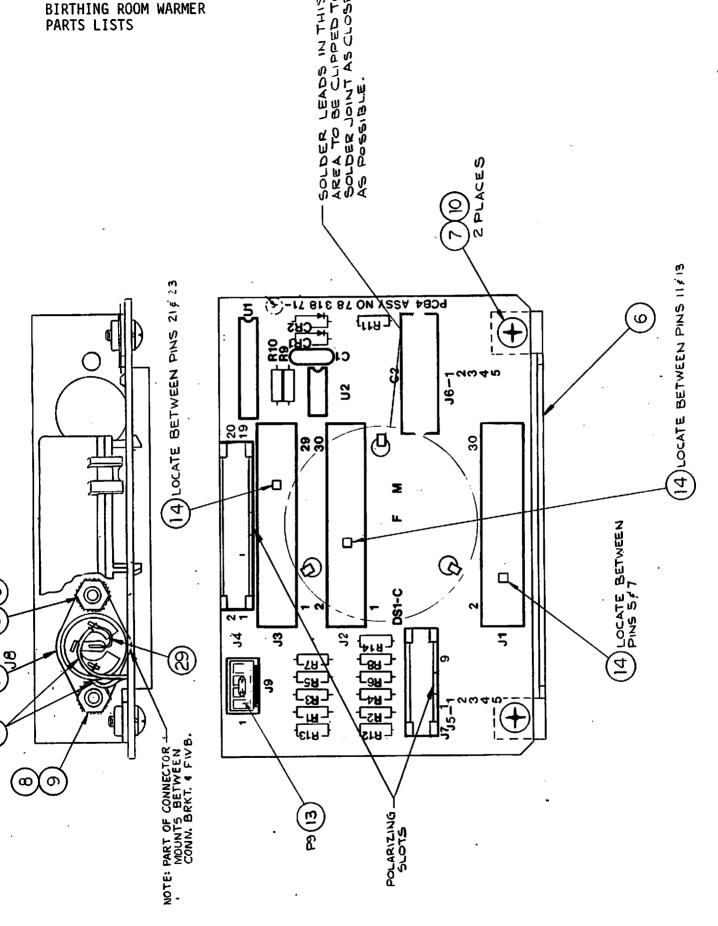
CONTROLLER MOTHER BOARD PCB4, PARTS LOCATION DIAGRAM
